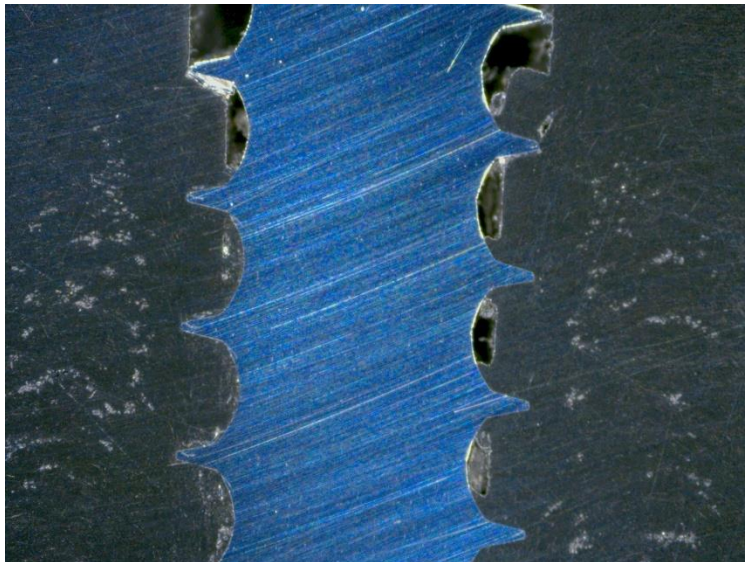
Head area screw boss: b&m-CARBONPLAST® 5x20 in PEEK-XCF30 with core hole \varnothing 4.0mm (1° conical – load-bearing area)
